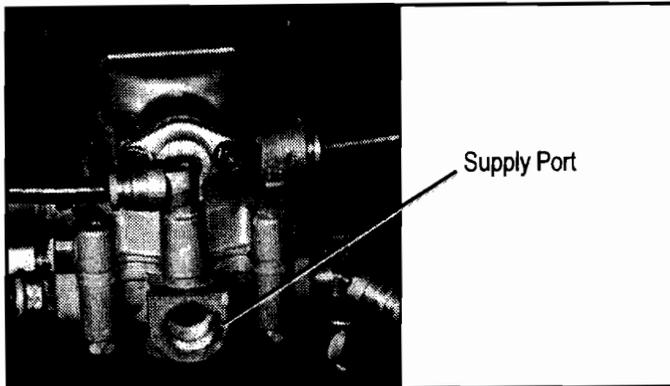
EXTERNAL SINGLE CHECK VALVE REMOVED
